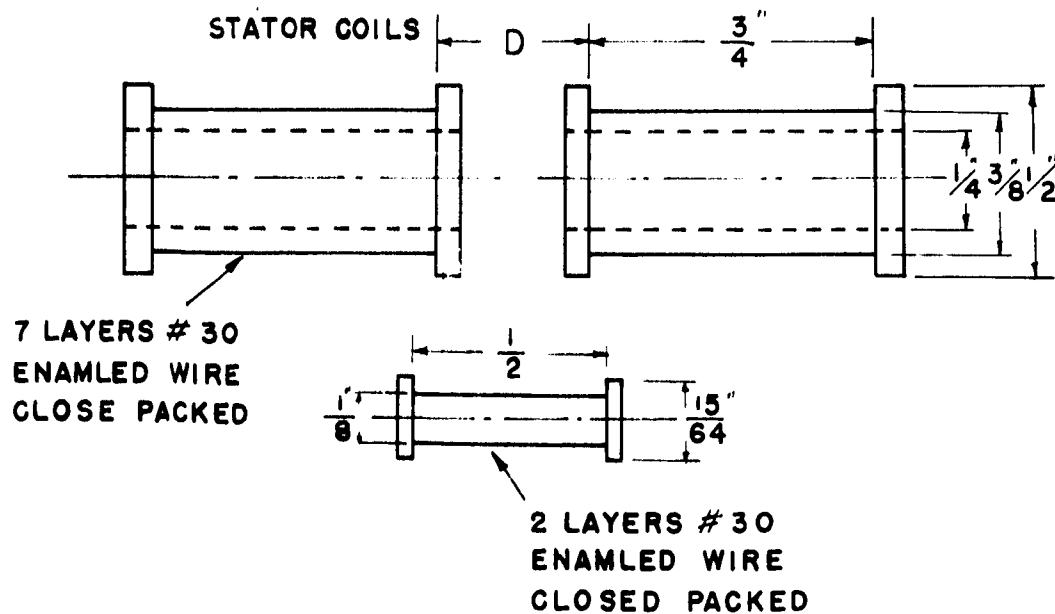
PHYSICAL DIMENSIONS OF AIR CORE LVDT
